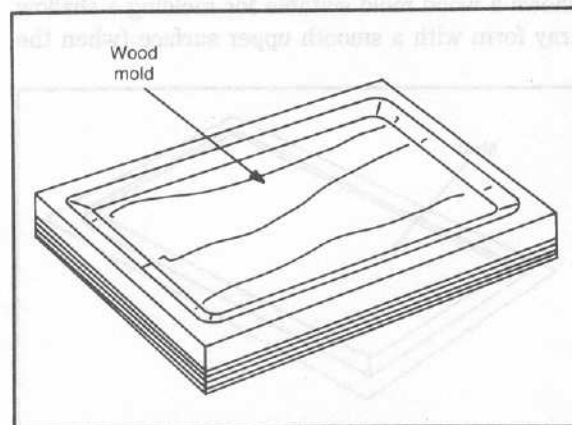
Wood mold for contact molding tray form with smooth convex side.
